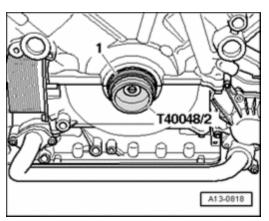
Inserting Assembly Device T40048/1 Onto Pull Sleeve T40048/2 And Sliding Seal Onto Pull Sleeve
